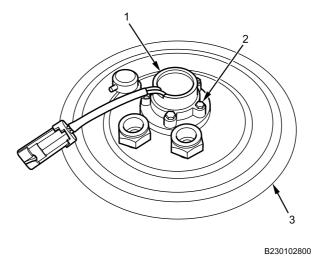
Fuel Level Sending Unit and Gasket Removal.
